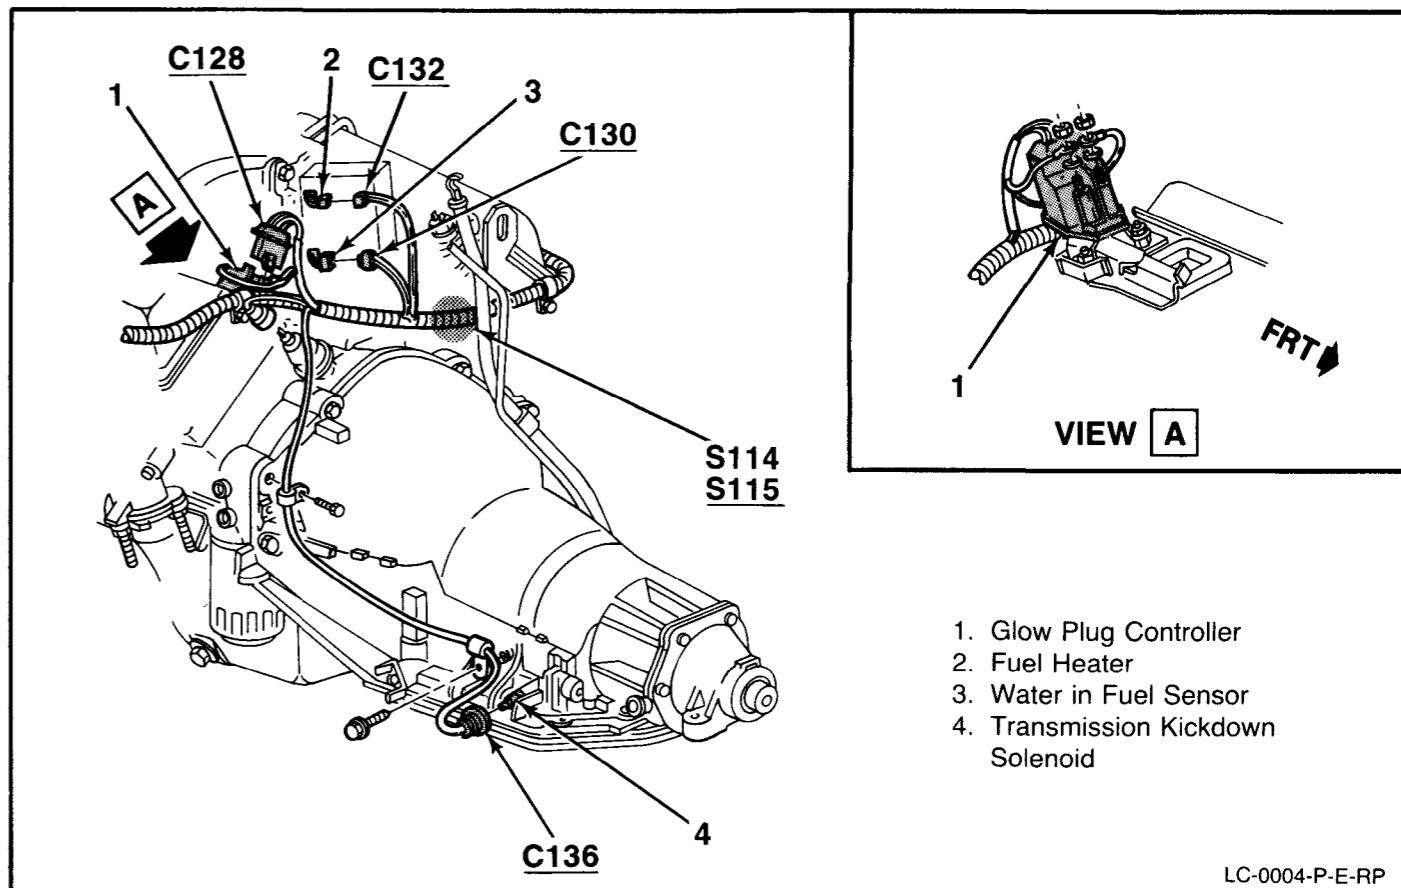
Engine Wiring Harness — Rear (RPO LL4)
